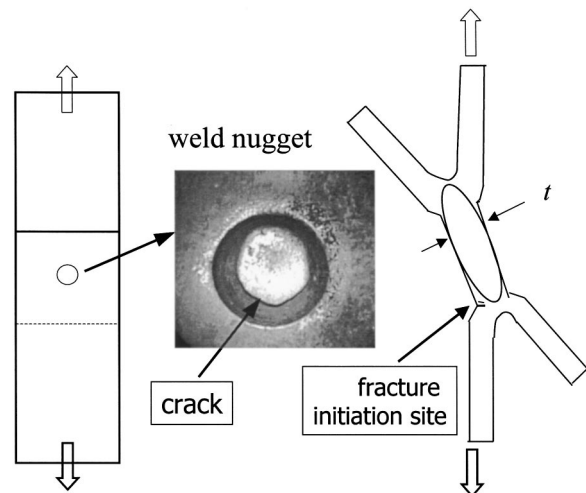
Fracture initiation site of a lap-shear spot-weld sample. The hairline at the bottom of the nugget is the crack.
